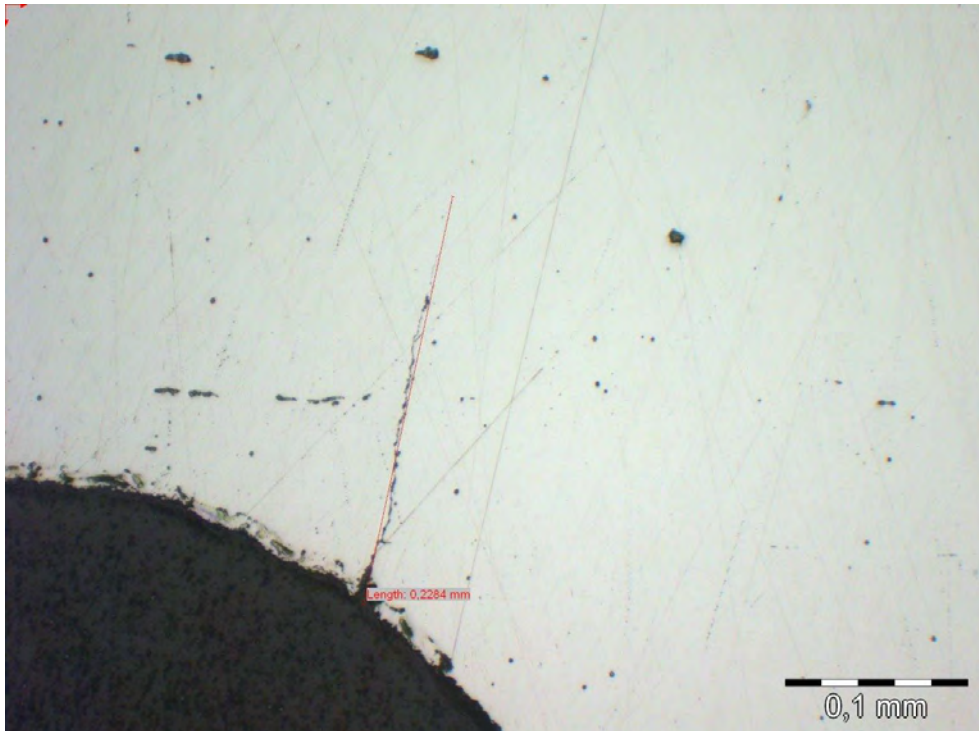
Crack at segment B, second ridge on barrel no. SFK 0120-A
